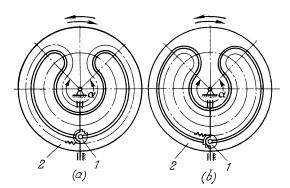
Diagram of a geared reversing mechanism for converting rotary motion into rotary reciprocating motion
